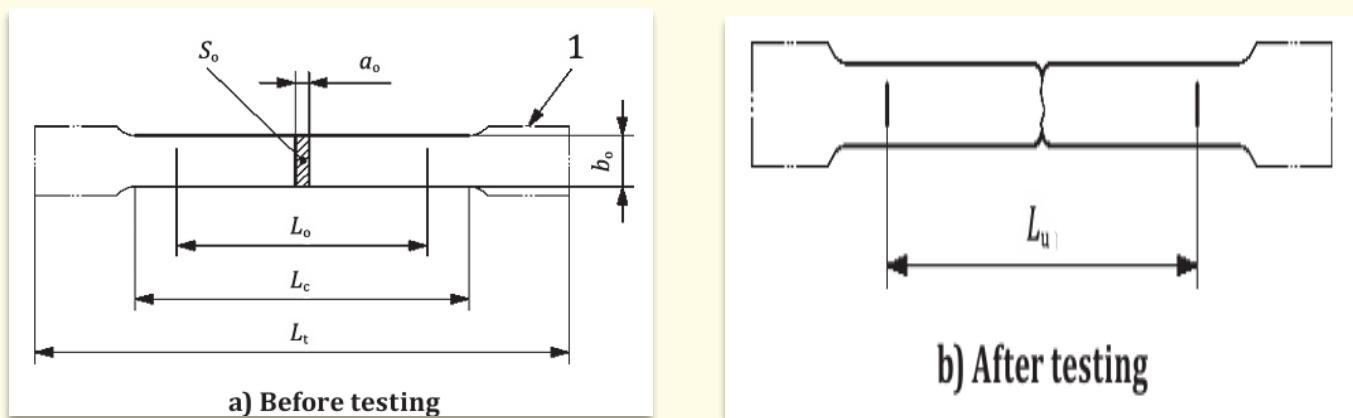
Figure: Source IS 1608 - Machined test pieces of rectangular cross-section
